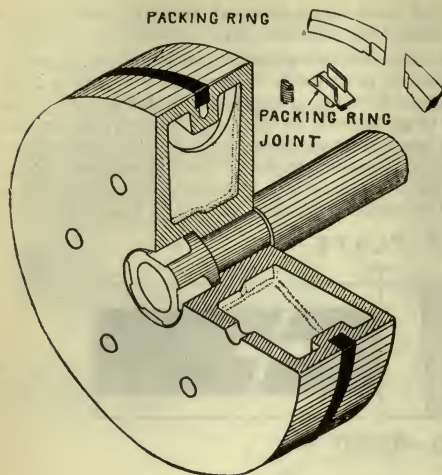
and 135.—Box piston. To reduce weight, large pistons are usually cast hollow with radial ribs. A single packing ring is shown pressed against the cylinder bore by the springs S. The ring joint is closed by a tongue piece T.
